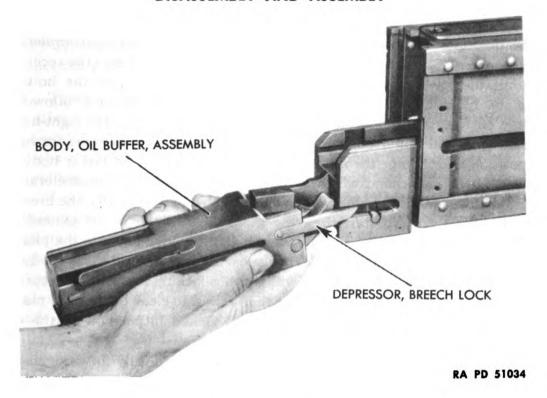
Proper Position Of Oil Buffer Body For Assembly
